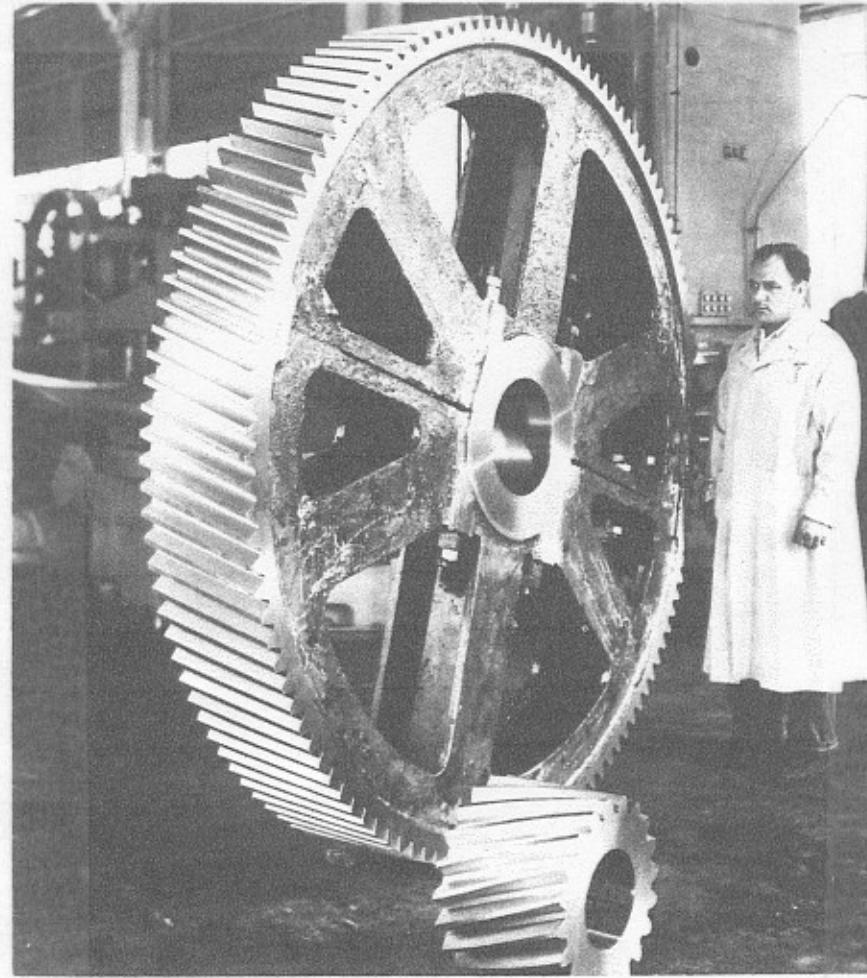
The gear shown is right handed, the pinion left handed. Because of the large size of the gear, it was manufactured in two halves and then assembled as shown. When gears are made in this manner, they are known as split gears.
